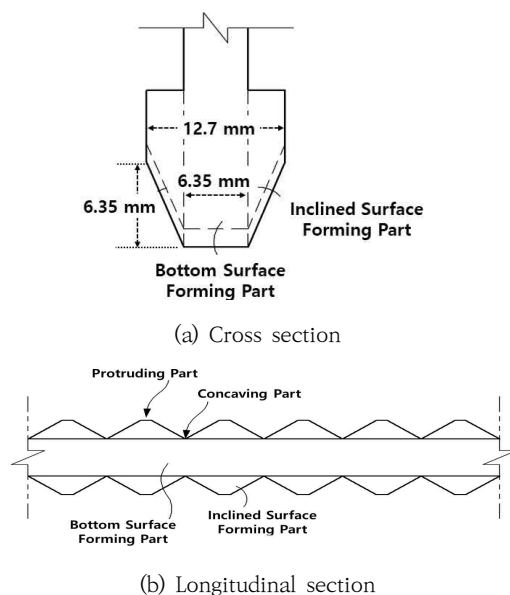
Cross section and longitudinal section of trapezoidal-shaped blade
